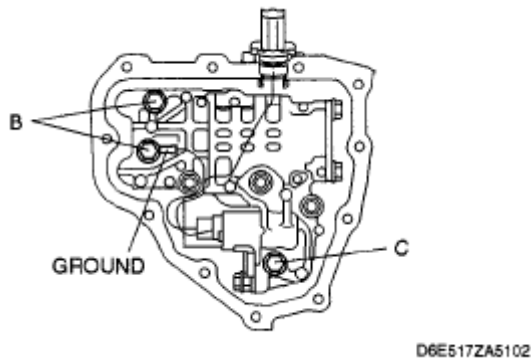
View Of Secondary Control Valve Body Bolts And Ground
